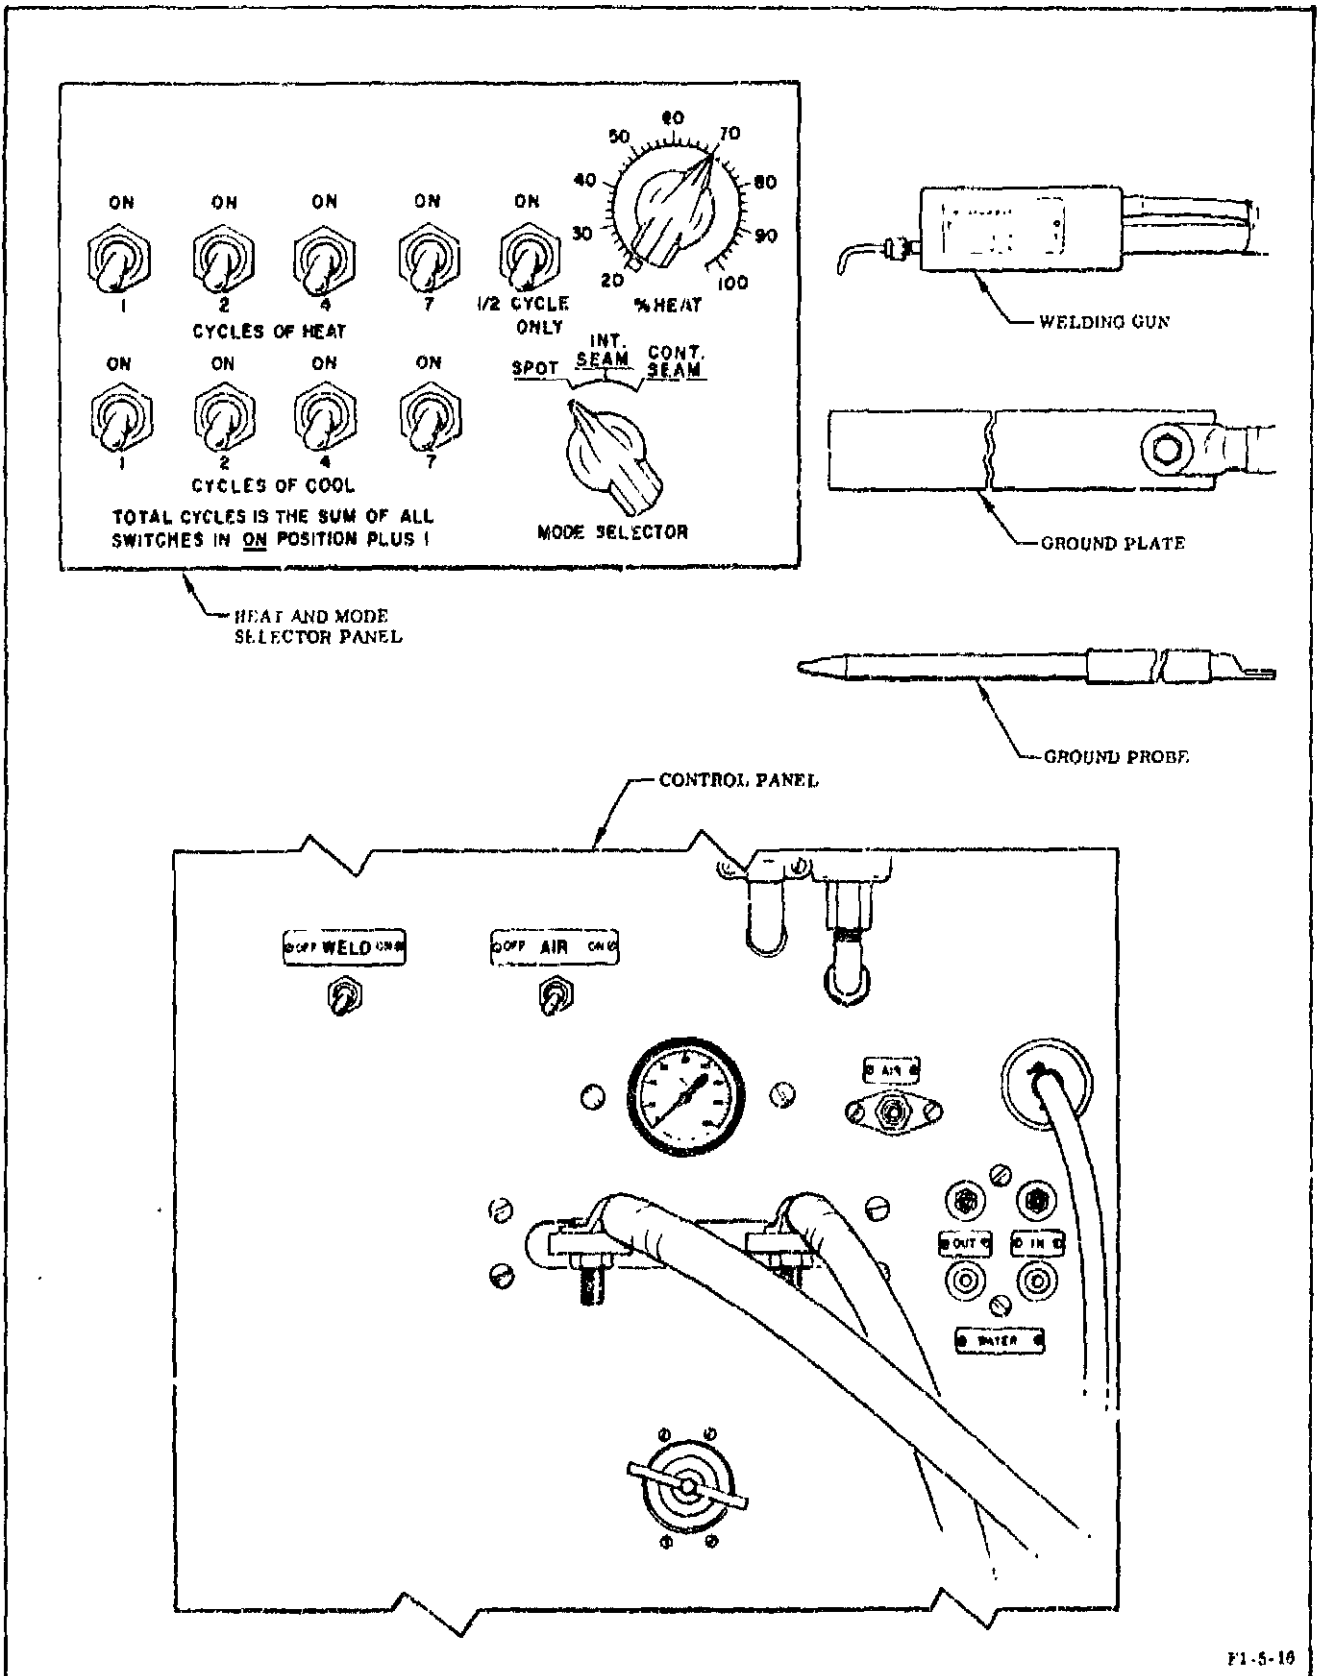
Components Welding Set 9026561 (Sheet 1 of 2)
